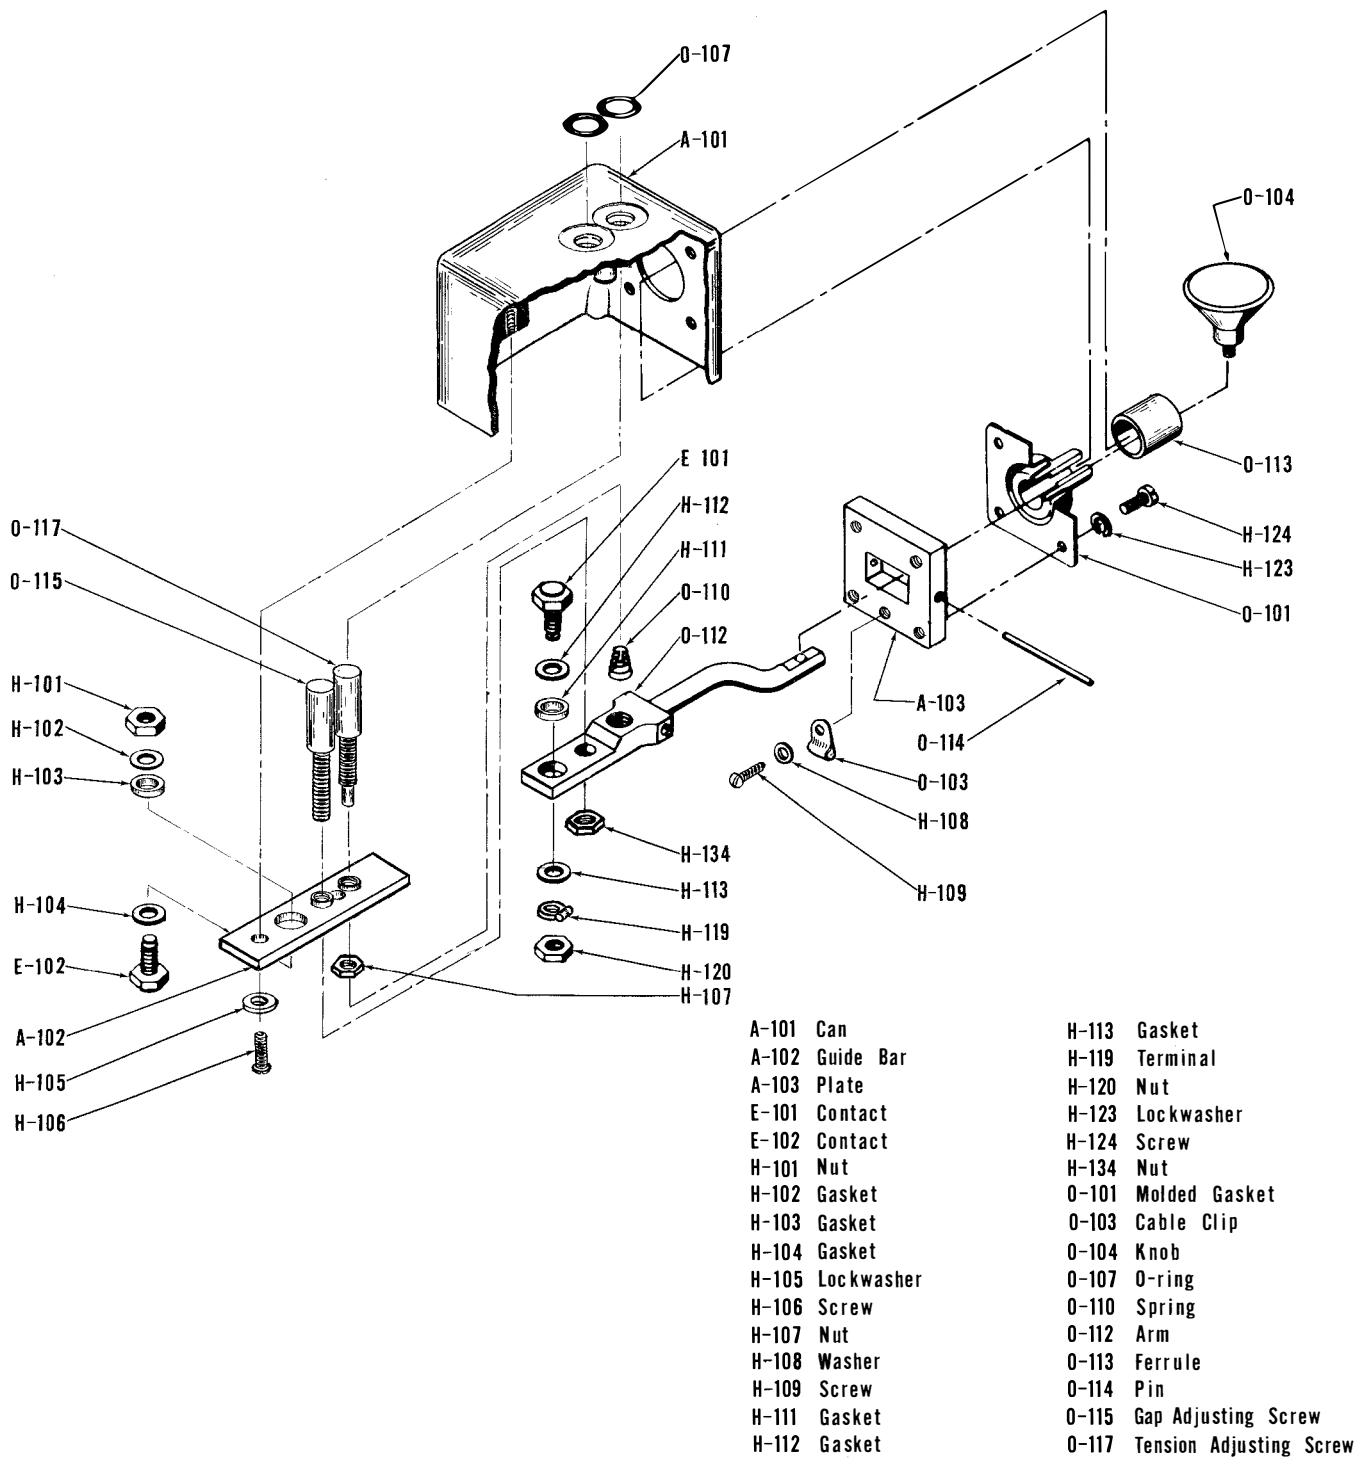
Control Panel Telegraph Key S-102, Exploded View
